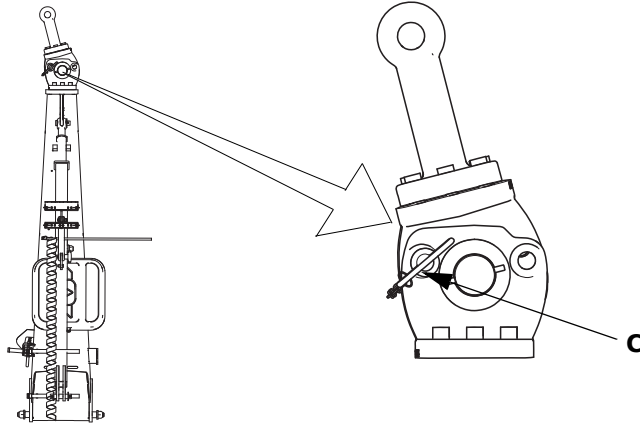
Drawbar in position 1, for drilling oilseed.
